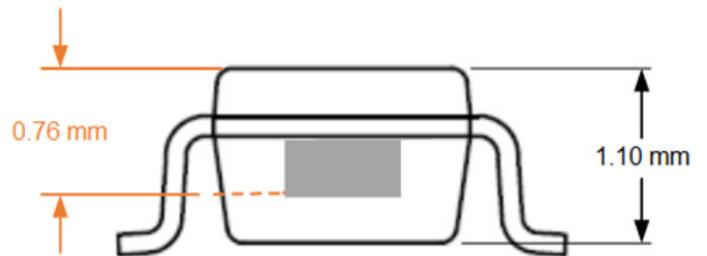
XtremeSense TMR Sensor Location in z Dimension for CT815x in SOT23 Package
